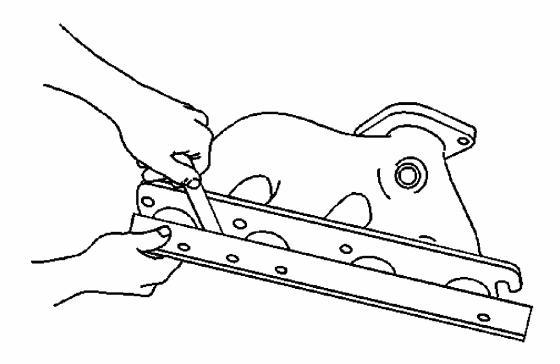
Measuring Surface Flatness Of Right Exhaust Manifold Flanges Courtesy of GENERAL MOTORS CORP.
